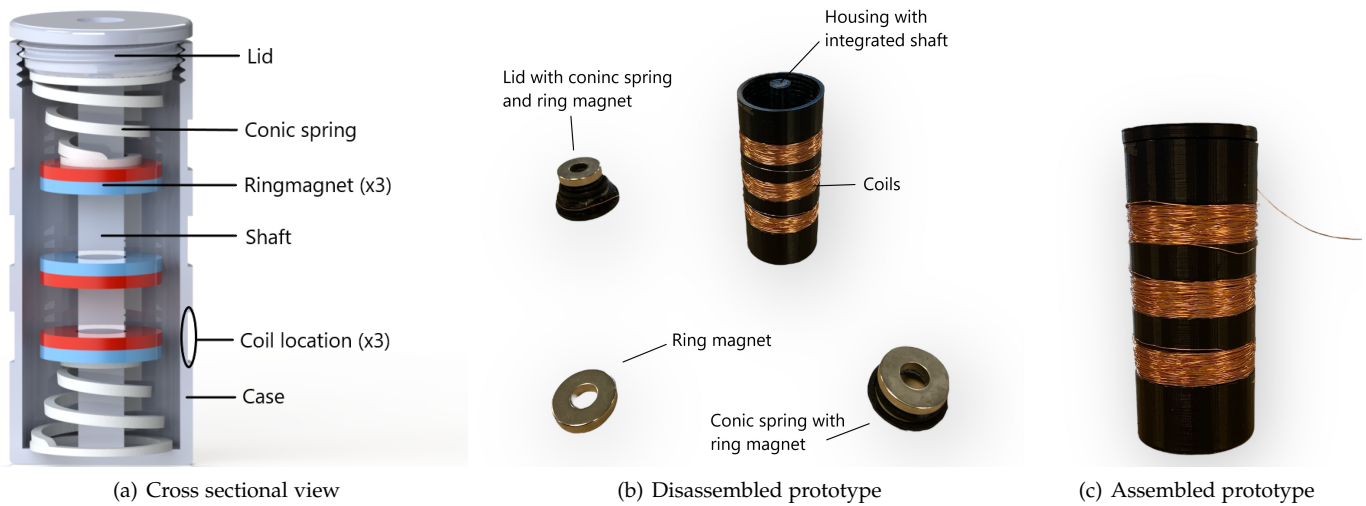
The levitated magnet - prototype design. The hydraulic piston shaft is replaced by a 3D printed axis. This prevents the magnets to flip inside the housing. The steel springs are replaced by 3D printed conic springs, since the steel windings of a normal spring are attracted by the magnets. Copper wire is wound around the housing to form 3 coils. Each coil contains 100 windings. The images from left to right show a cross sectional view of the design (a), a disassembled view (b) and an assembled view (c).
